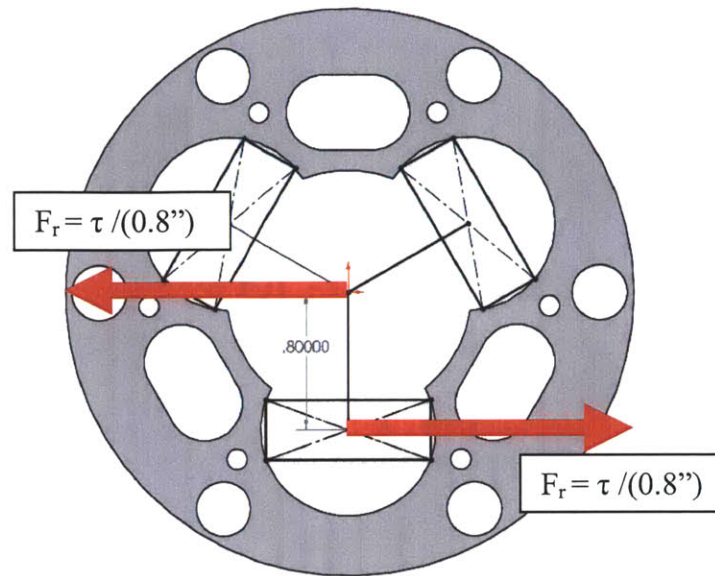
An axial view of a tripod joint, illustrating single-point-of-contact torque generation: the worst-case radial loading possible for tripod bearings, propeller bearings, and propeller shaft bearings.
